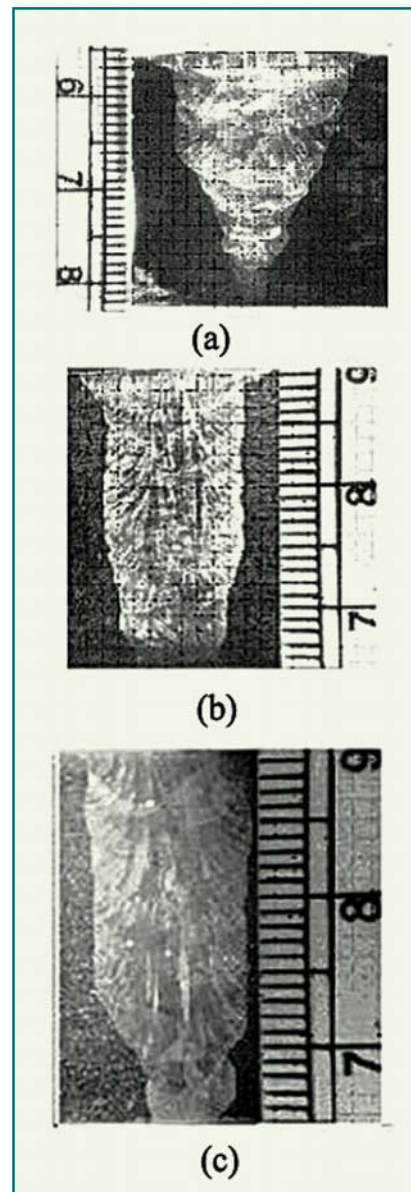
Cross section of weld joints with different gap or groove widths
